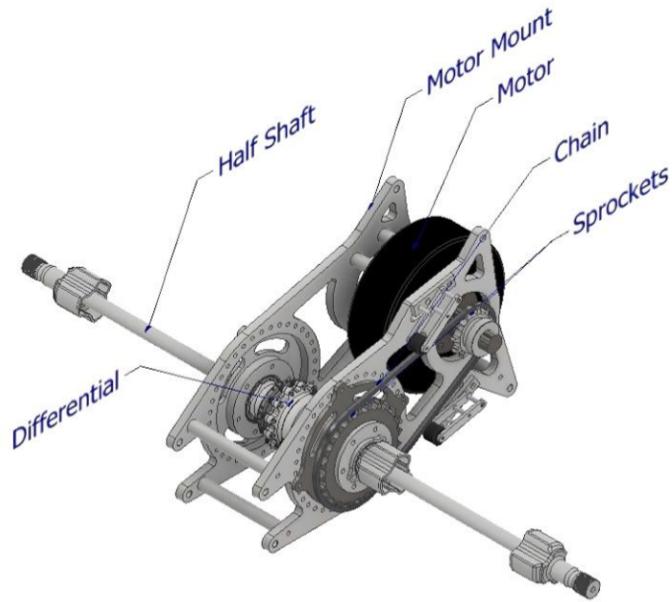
Rear Wheel Drivetrain Assembly [60]
